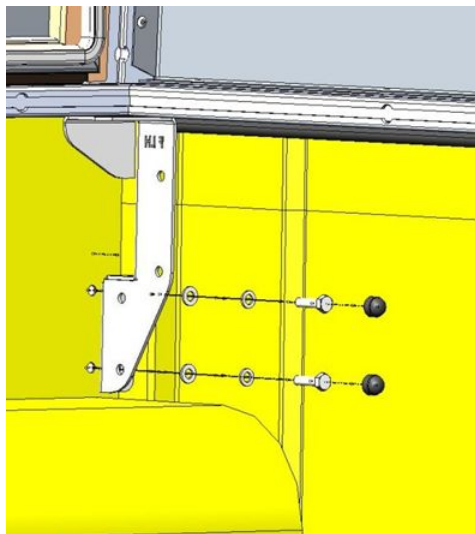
Position Front Riser Brackets over the mounting holes on the load bin and fasten with 2x M8x30 Hex bolts, washers, nyloc nuts and nut caps.
